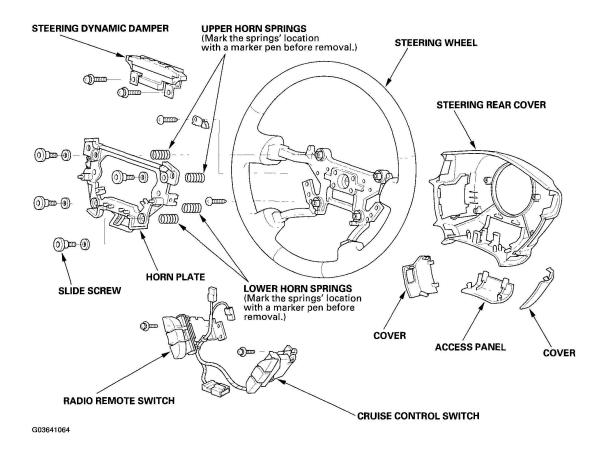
Exploded View Of Steering Wheel Components Courtesy of AMERICAN HONDA MOTOR CO., INC.
